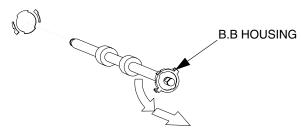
Removal of the Feed Roller Assembly 1, 2, 3 and 4
